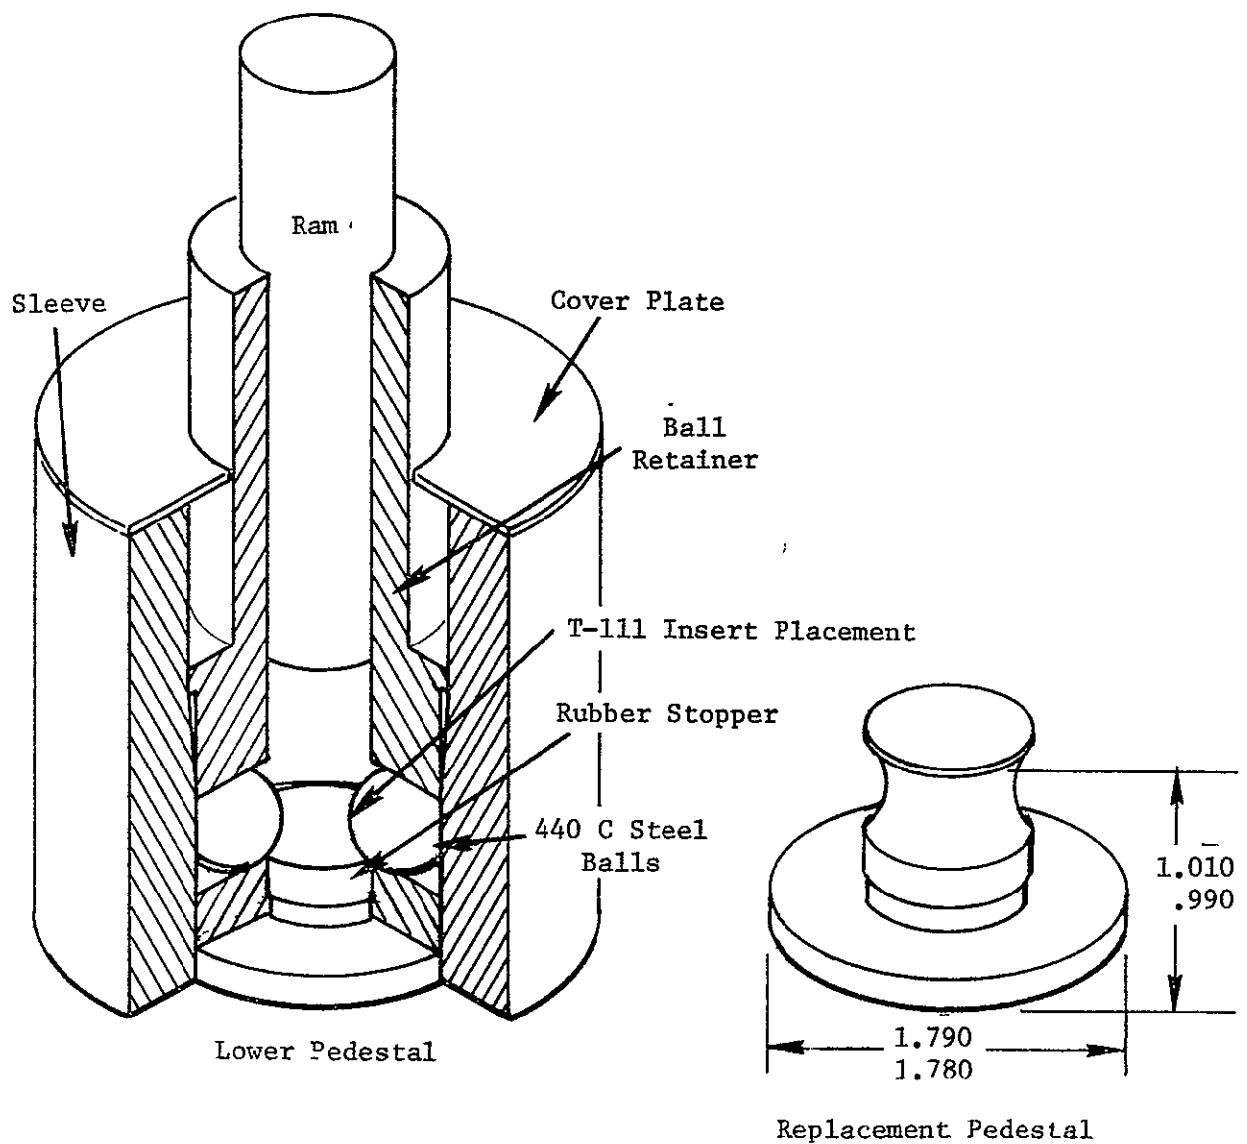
Fixture for Indenting 0.83-Inch-OD T-111 Inserts.
